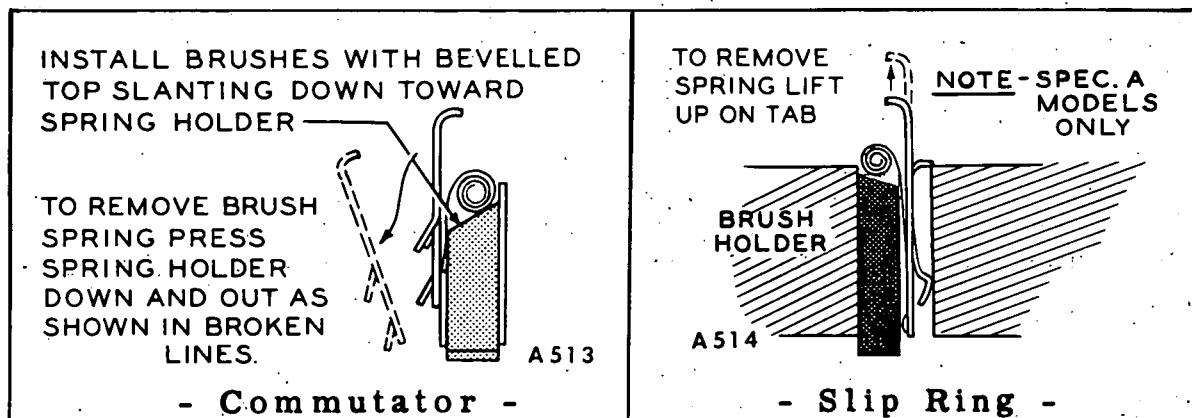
BRUSHES AND SPRINGS (Constant Pressure Type)
